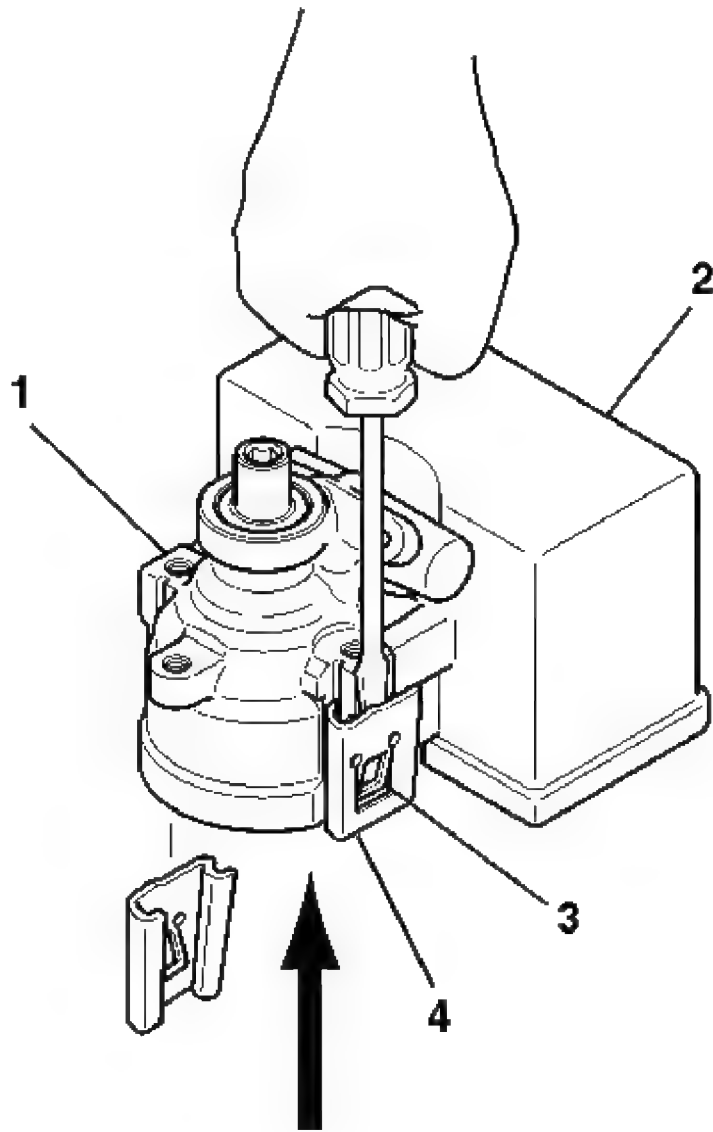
View Of Power Steering Pump And Reservoir (CB Series)
